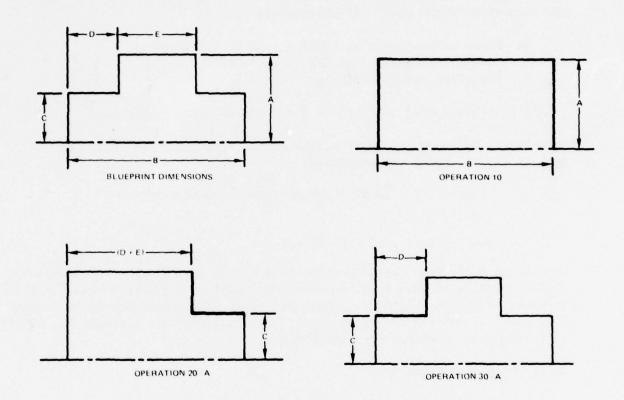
MACHINING TO CALCULATED DIMENSIONS
